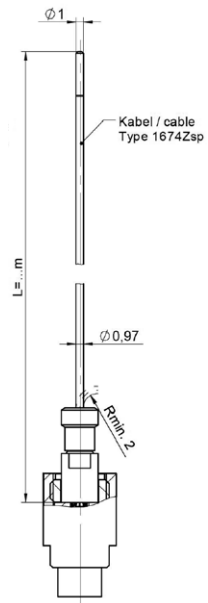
Sensor Typ 6172B with single-wire cable and crimp pin
